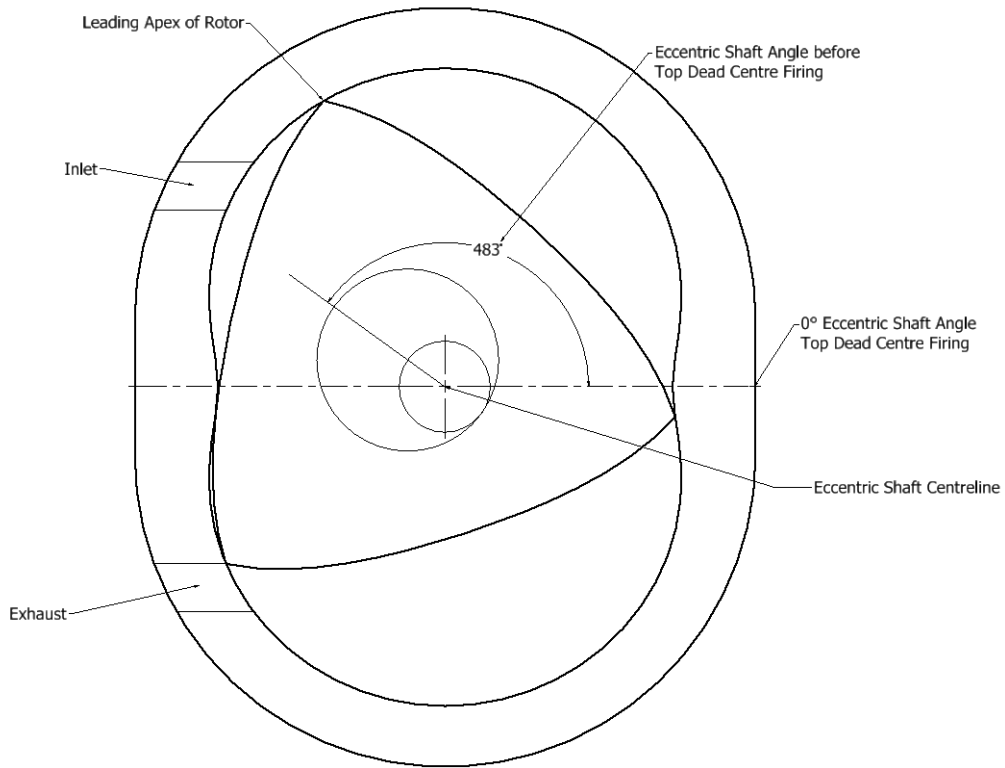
Injector position relative to top dead centre firing. The injector is positioned in the housing in line with the leading apex rotor seal with the eccentric shaft positioned relative to top dead centre firing. 483° before top dead centre (TDC) firing is equivalent to 597° after TDC firing
